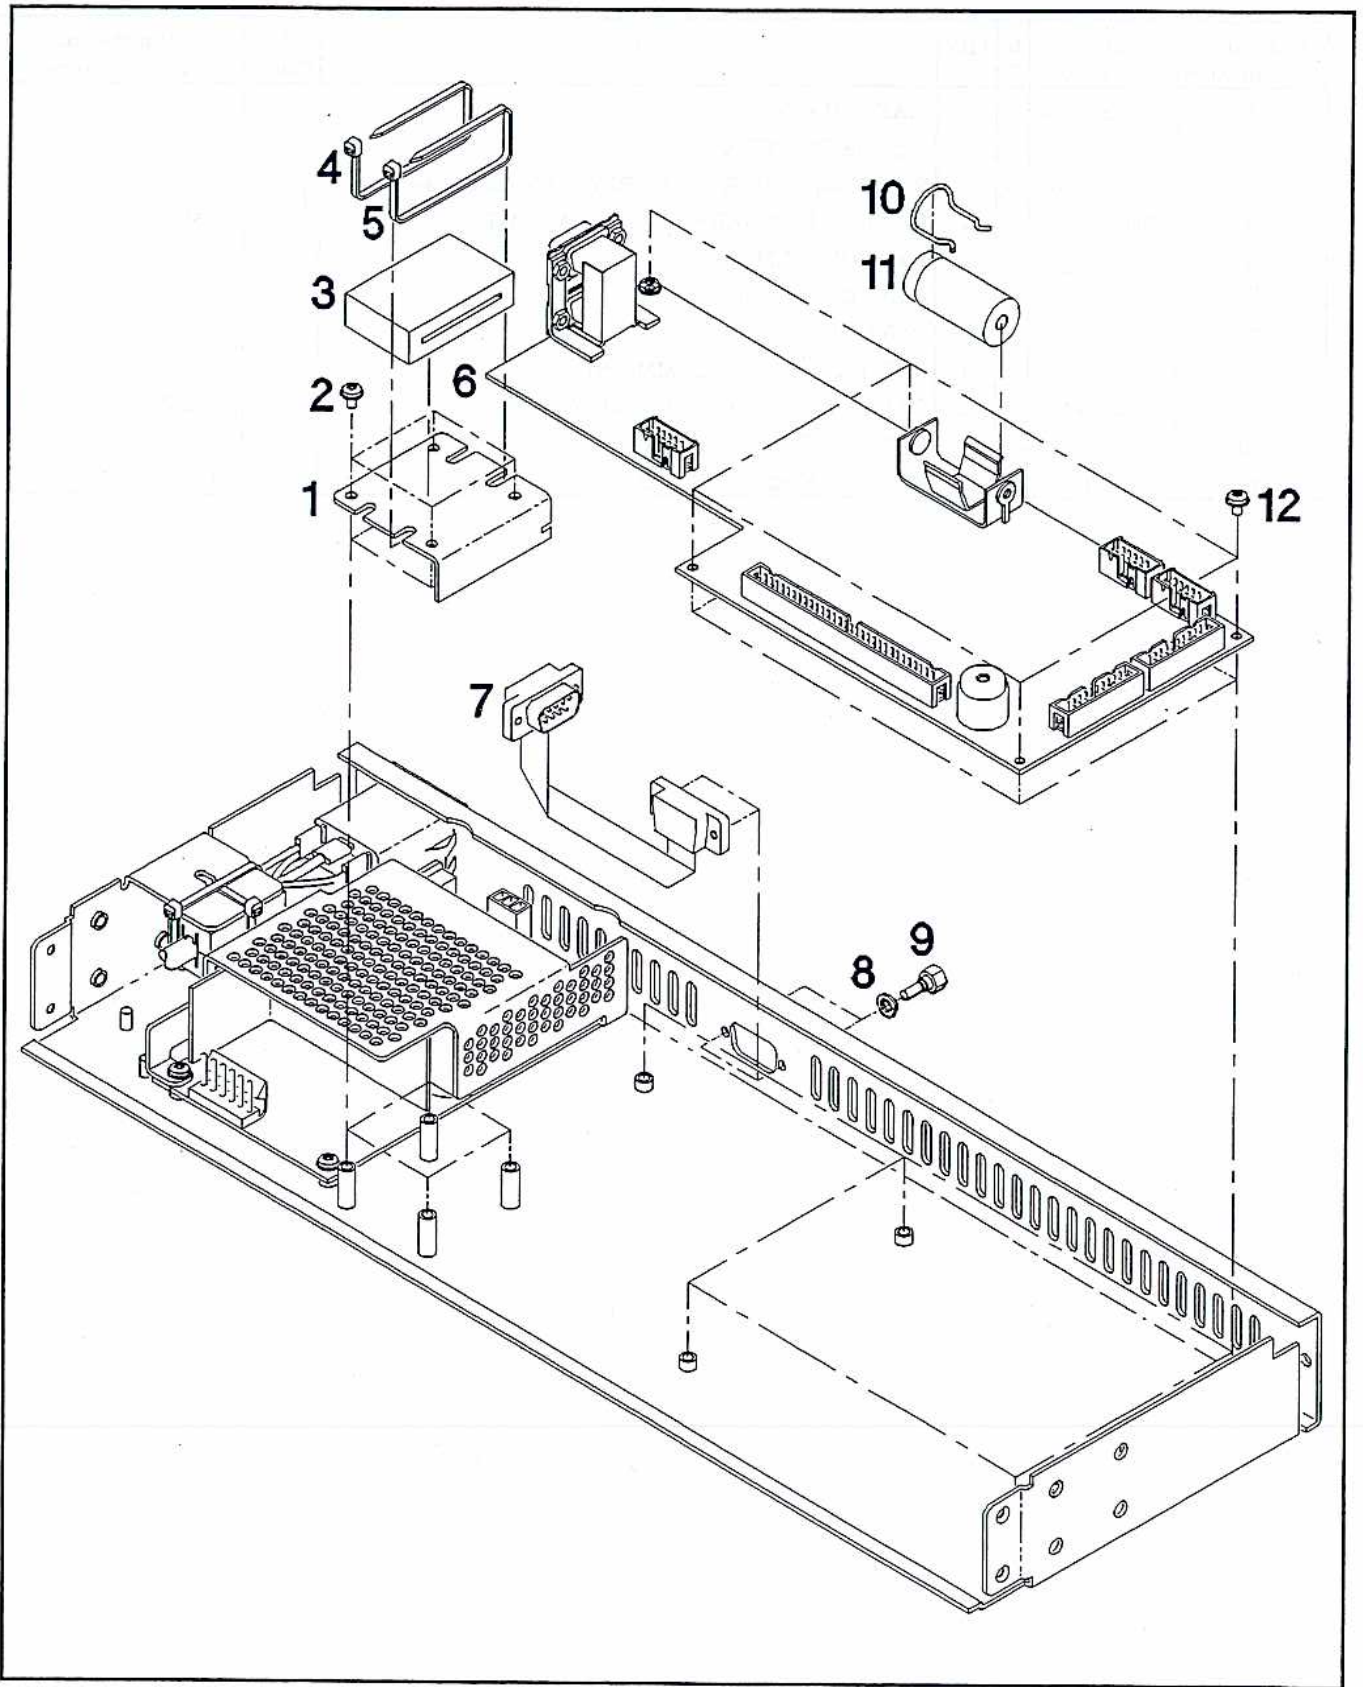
Microprocessor Board Illustrated Parts Breakdown—HP Remote Front Panel
